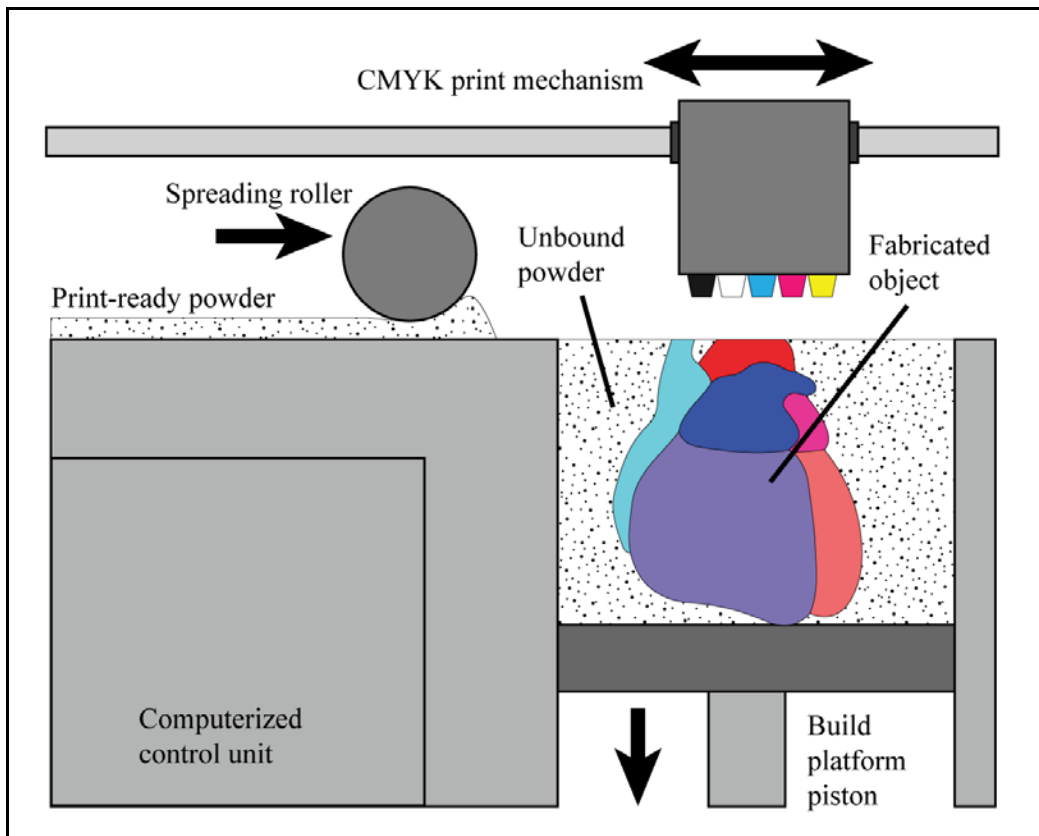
Schematic of the inkjet 3D printing process. A roller spreads a layer of powder on the build platform. A CMYK ink-cyanoacrylate print cartridge binds the single layer of powder together through inkjet deposition. The build platform lowers and the process is continuously repeated until the 3D print is complete.
